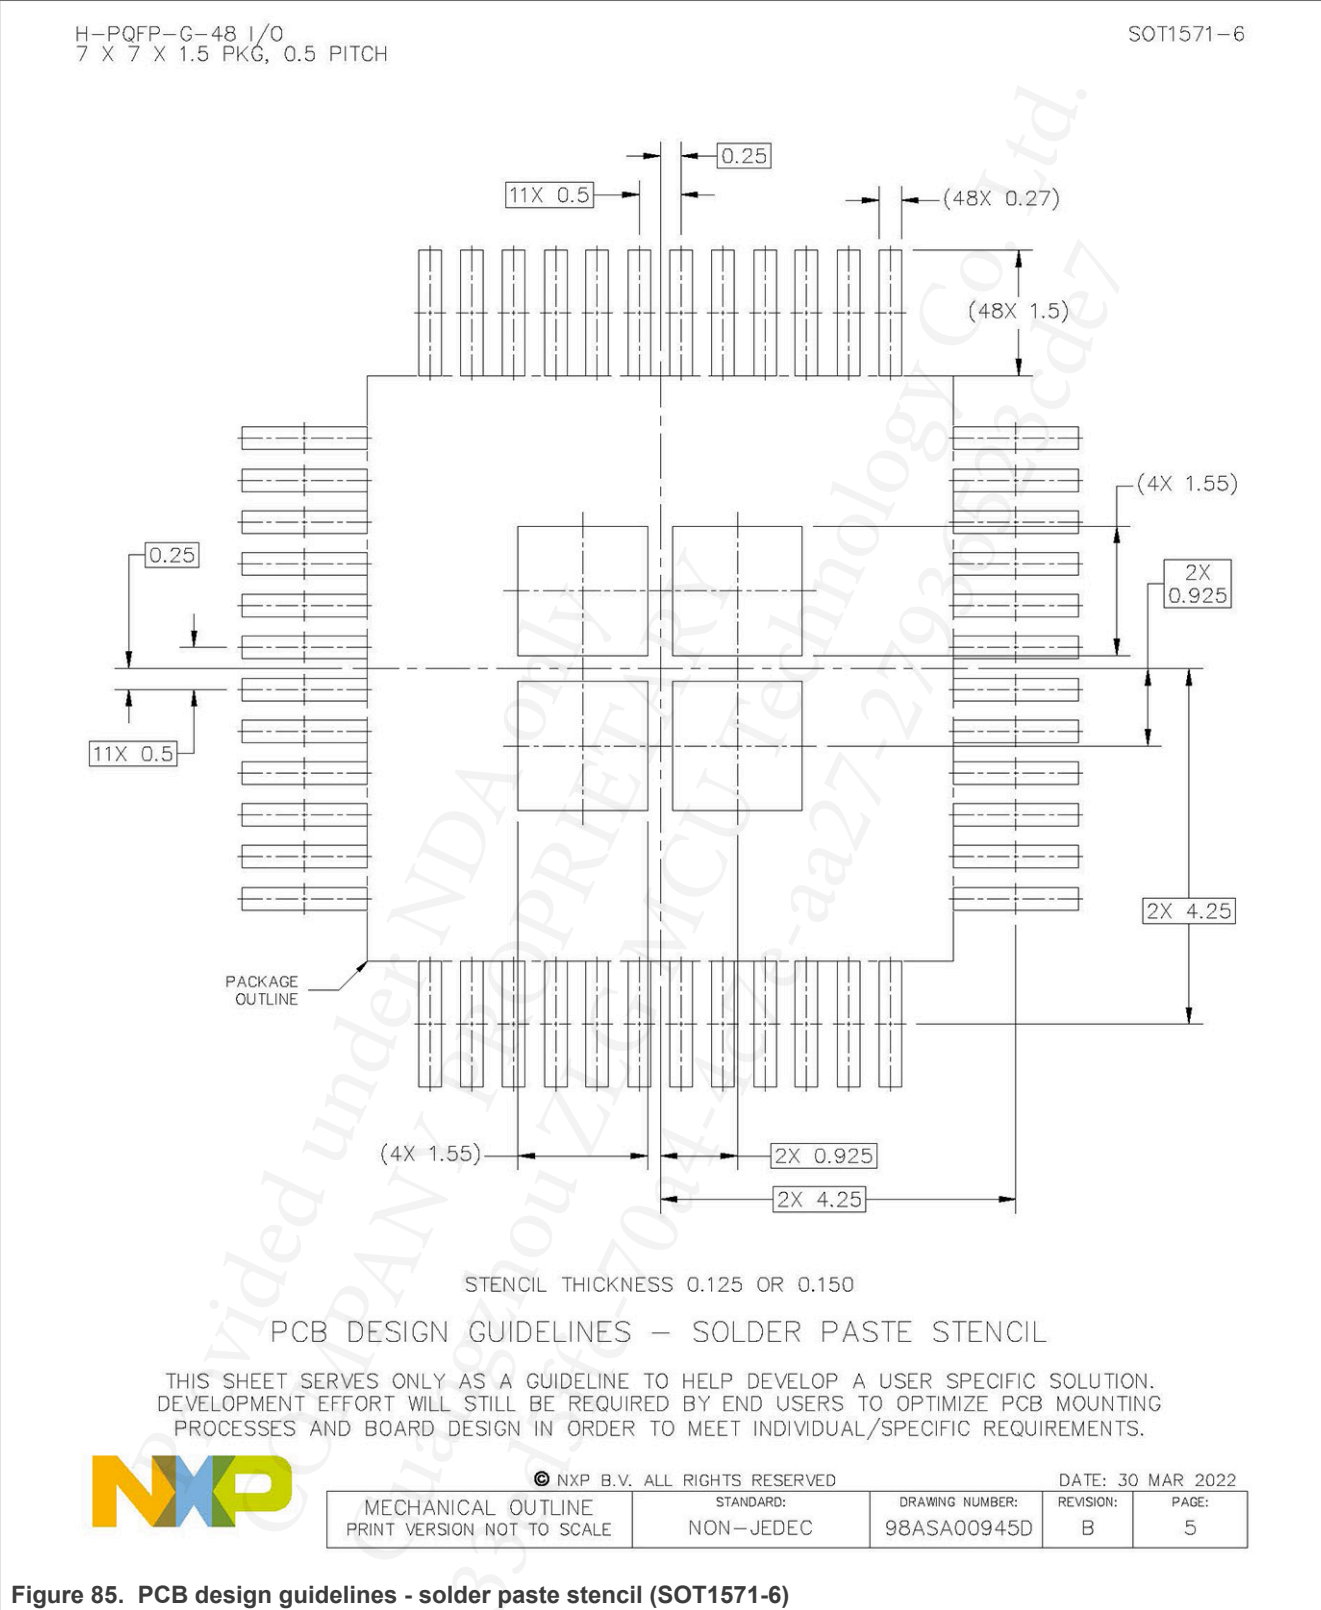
PCB design guidelines - solder paste stencil (SOT1571-6)
